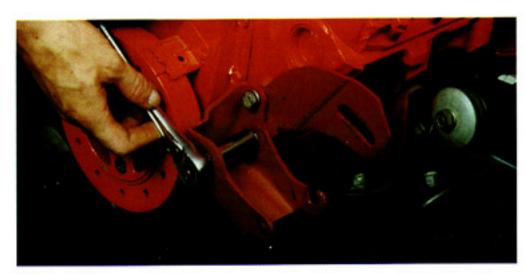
Step 6. Position the two brackets and start to thread the two 1 1/4" bolts and lock washers into the front of the block. The bolts go through the forward bracket, then through the rear bracket, and then into the block.
